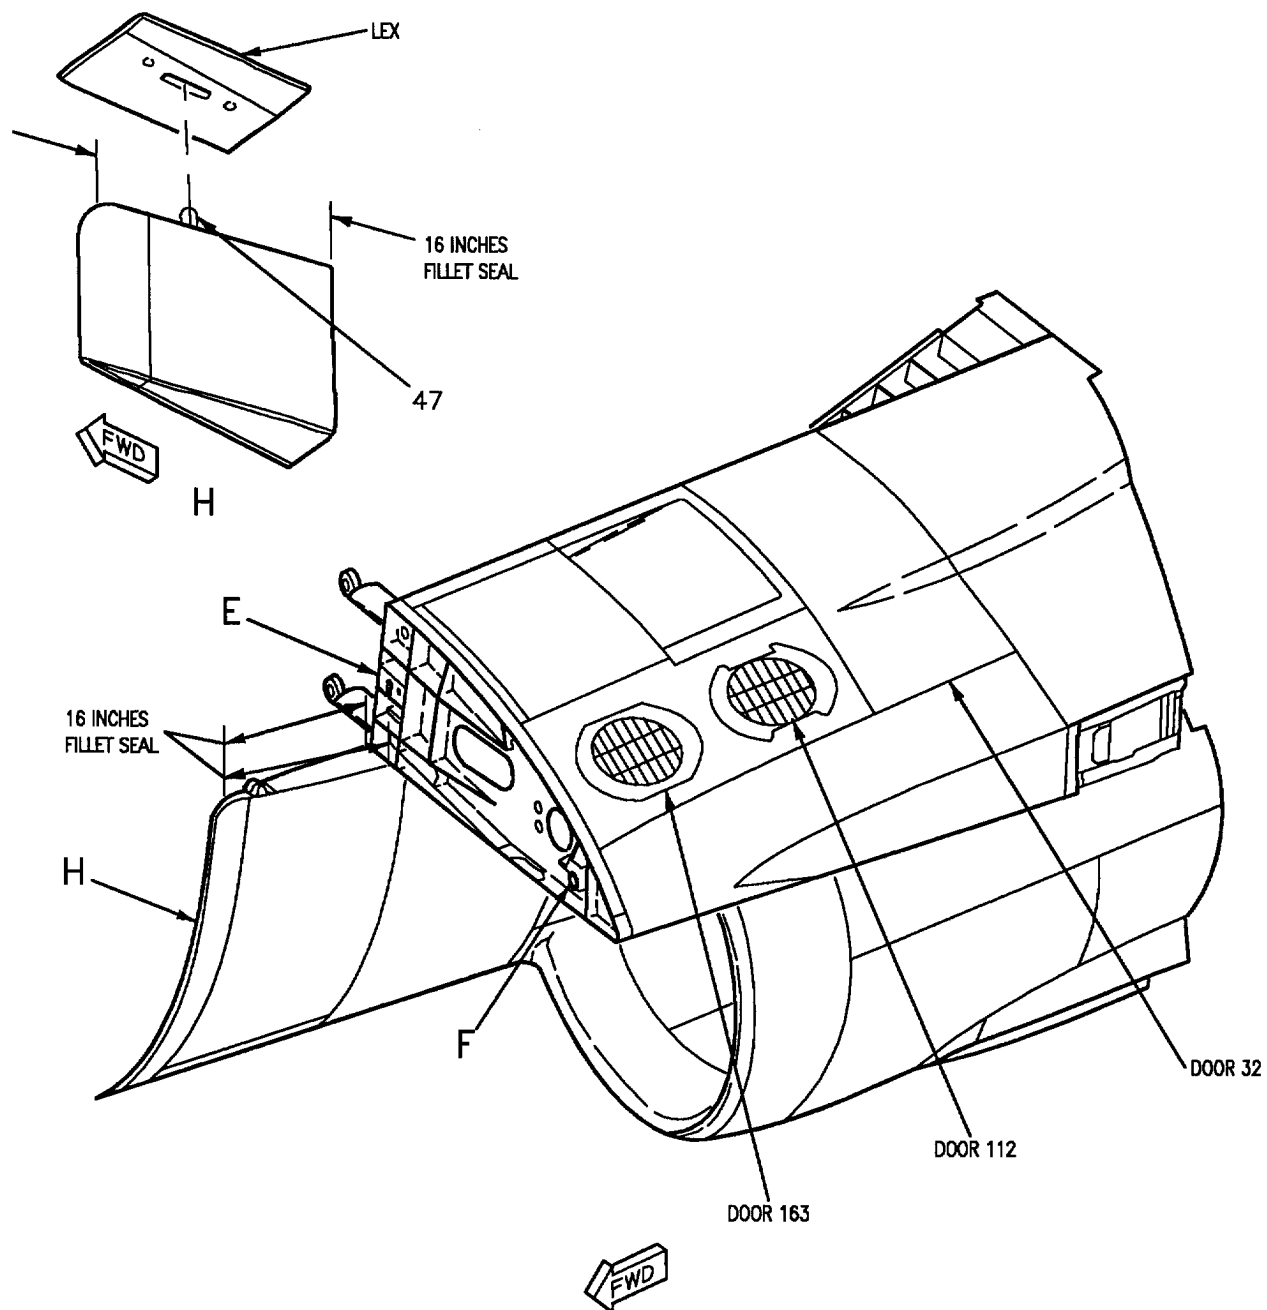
Leading Edge Extension Removal and Installation (Sheet 3)
